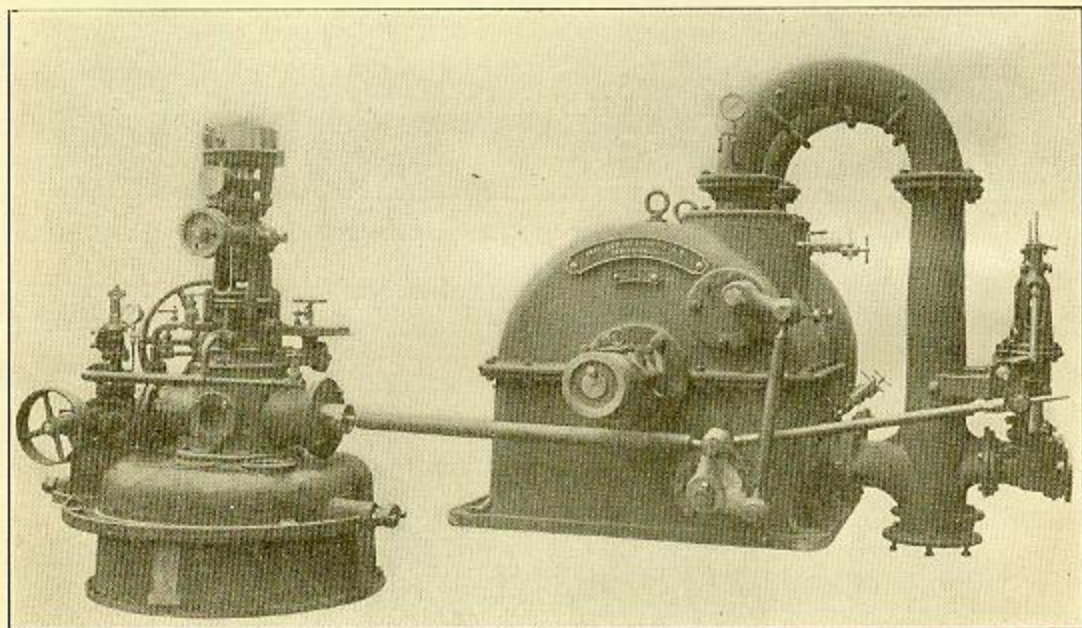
Photograph of 600 H.P. Double Impulse Wheel Assembled with its Governor.
